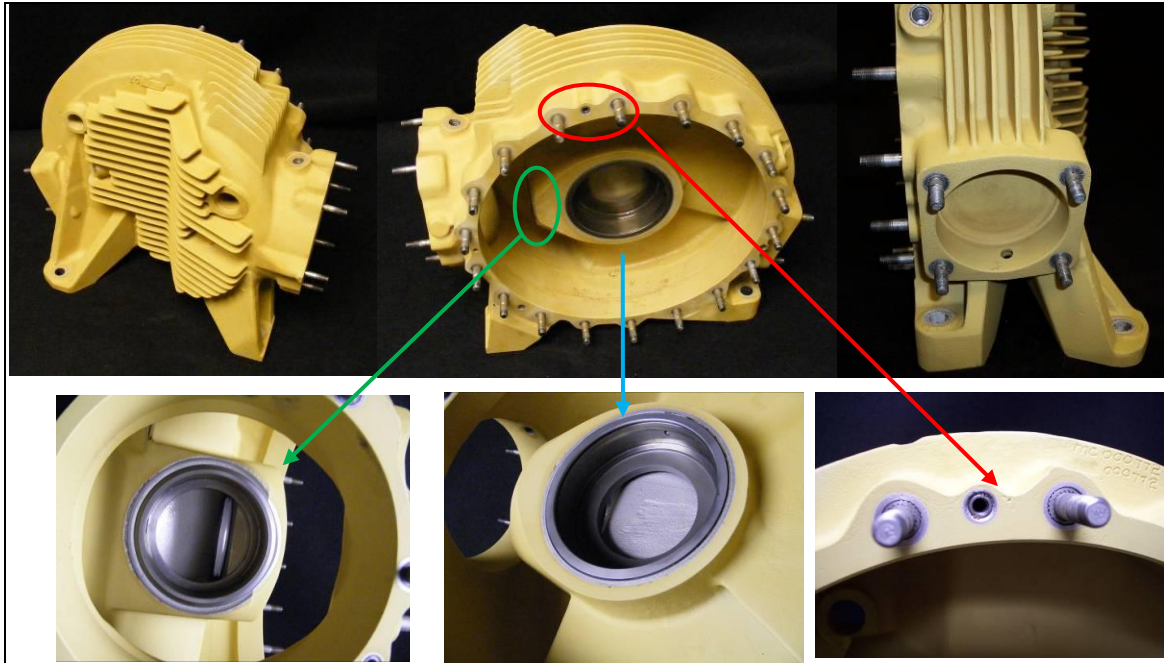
H-64 tail rotor gearbox housing after Tagnite 8500.
